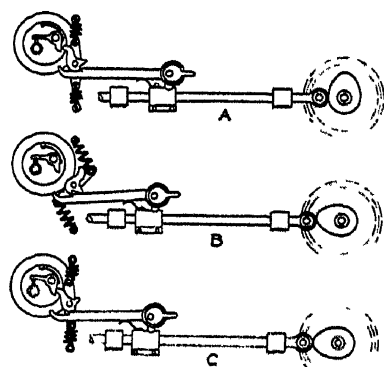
Typical slide-rod type make-and-break ignition mechanism. (A) At start. (B) At moment of trip off. (C) After trip-off.
